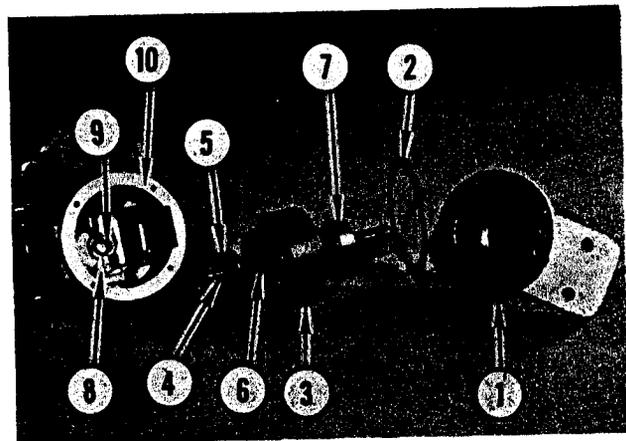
TAILSHAFT GOVERNOR DISASSEMBLY (PF ONLY)
